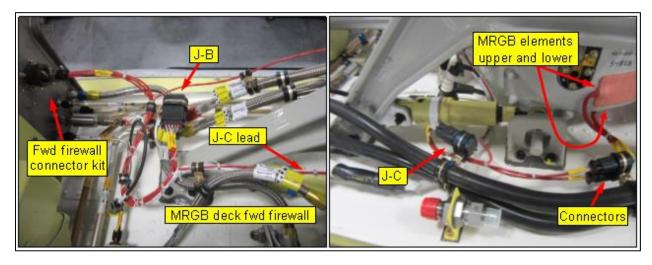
Main rotor gearbox (MRGB) routing and elements:
